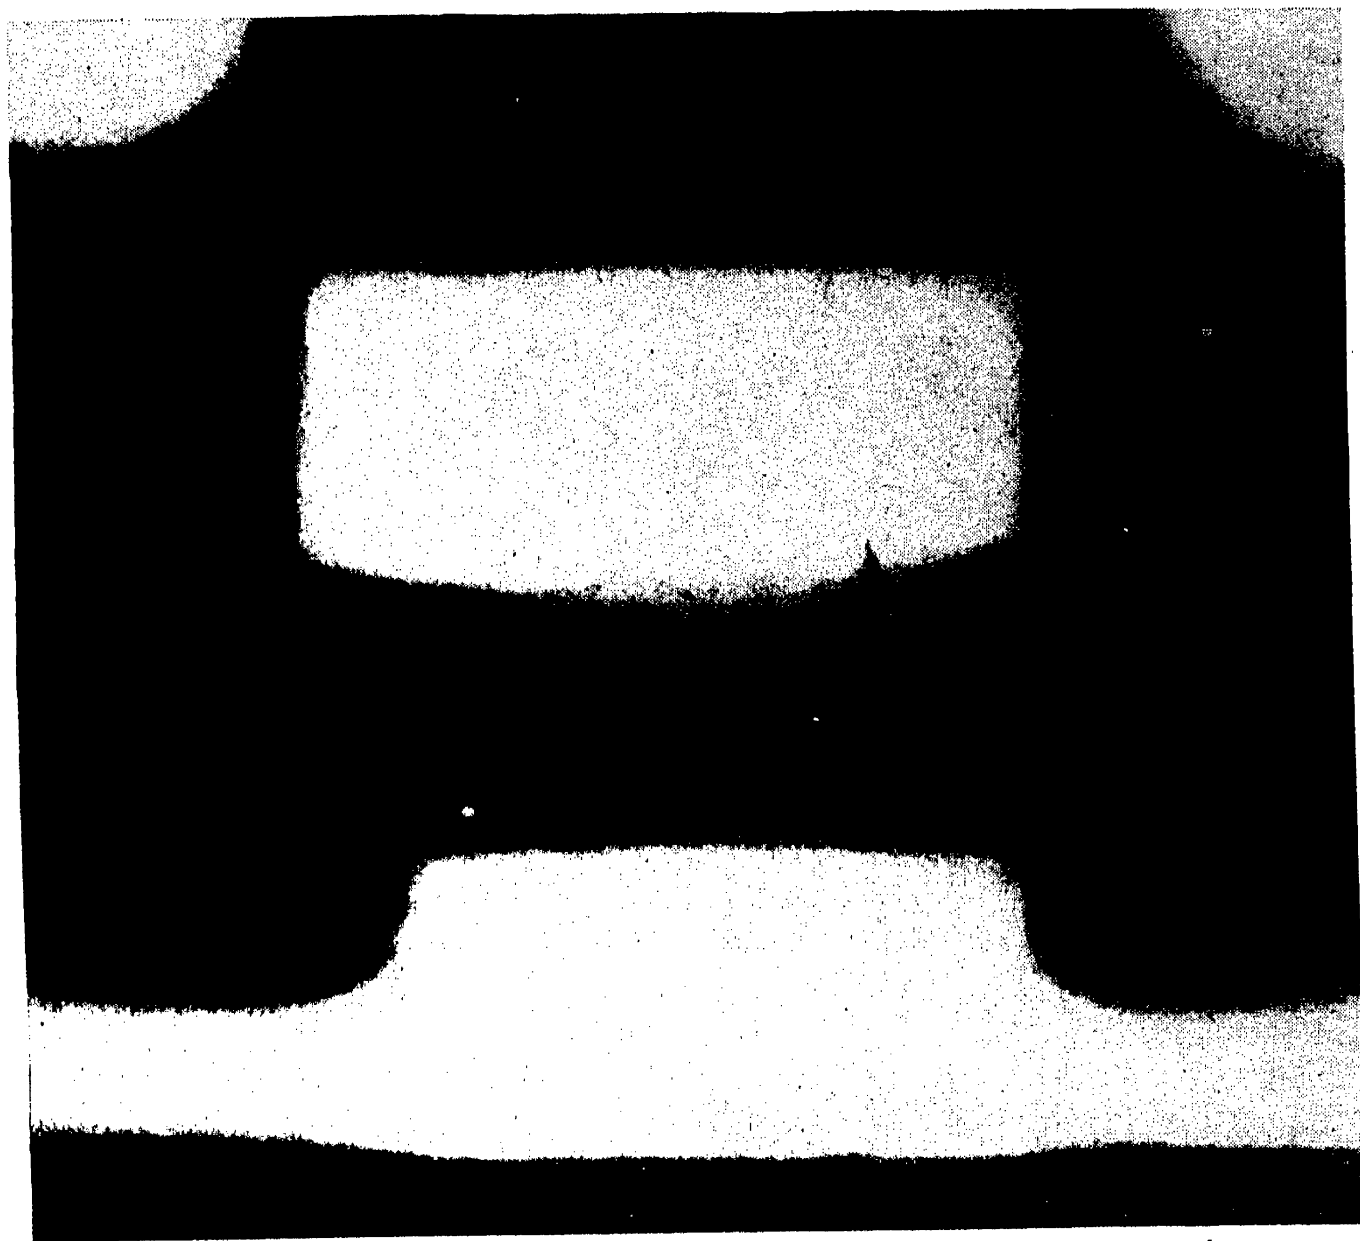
Cracks in steel casting located near abrupt change in section.
